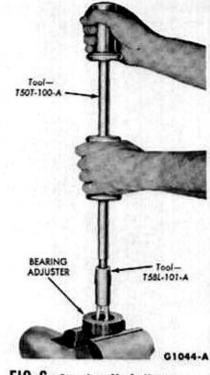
Steering Shaft Upper Bearing Cup Removal
